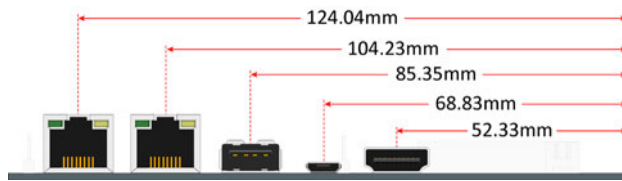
External I/O dimensions of the VIA VAB-950 (back panel)
